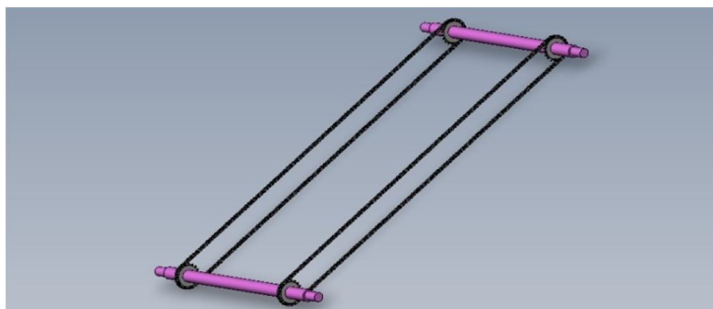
Chain and sprocket mechanism attached to bearing shaft
